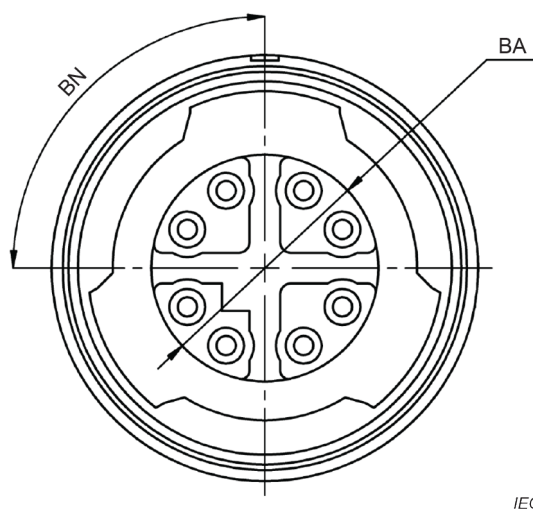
Front view of the female side of the push-pull housing for X-coding
